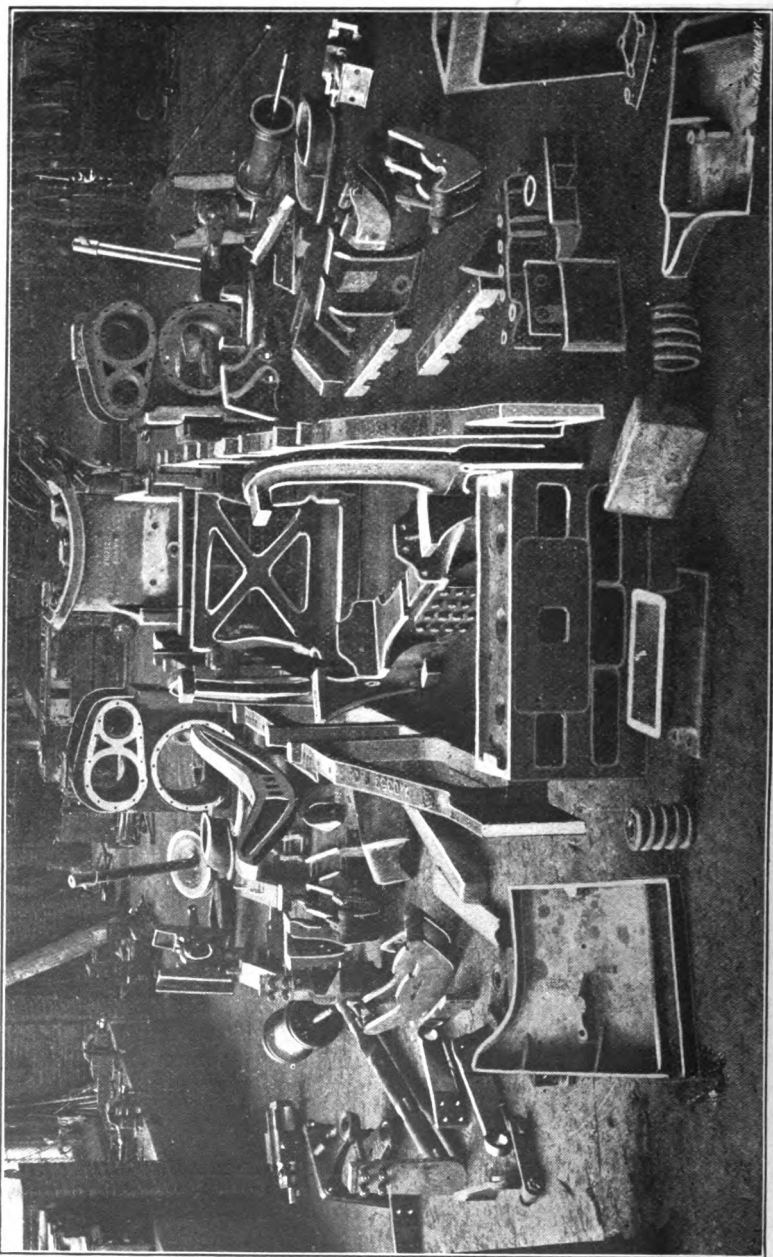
Parts Ready for the Frame Gang in the Assembling Shop
